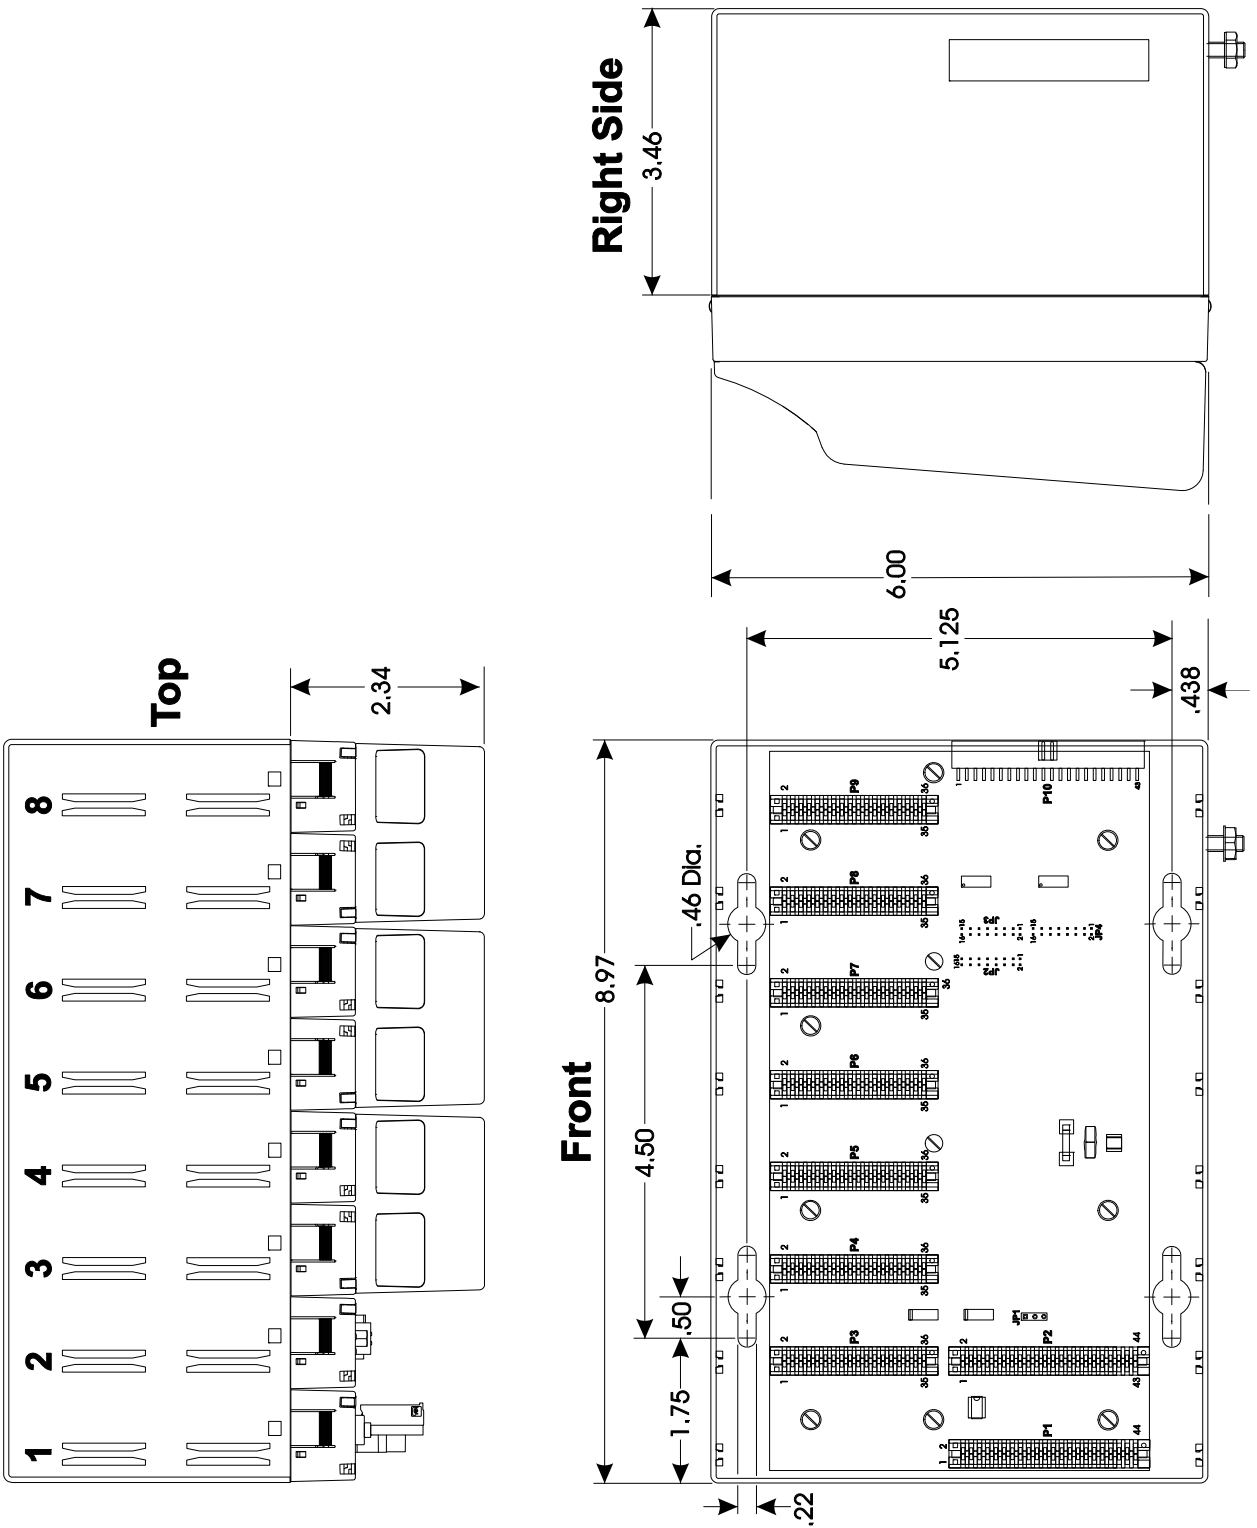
8-Slot ControlWave EFM - Base Chassis Assembly Dimensions
